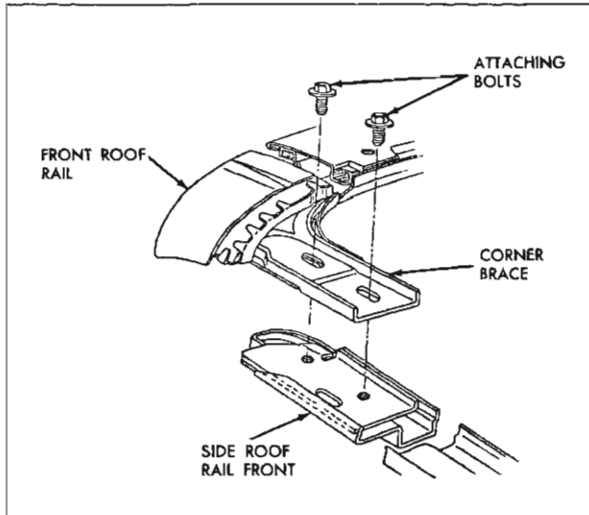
Front Roof Rail Corner Brace Adjustment
